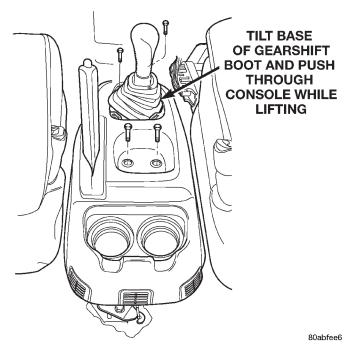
Console, Parking Brake Lever, and Gearshift Boot
